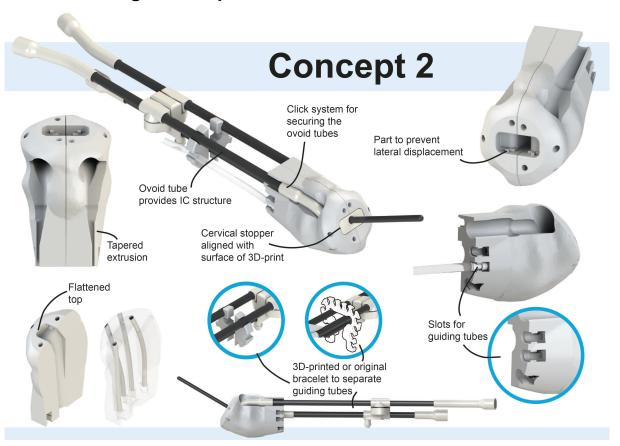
Final design Concept 2: two short 3D-printed parts with a tapered extrusion conform the shape of the patients' vaginal cavity. The part can be clicked on the Geneva ovoid tubes, which provide the IC structure. The short length of the parts ensure printability of the needle channels. IS needles can be inserted through guiding tubes which are clicked in the distal end of the 3D-printed parts. To prevent needle channel mix-up, a customised bracelet can be 3D-printed and clicked on the ovoid tube to separate the guiding tubes.
